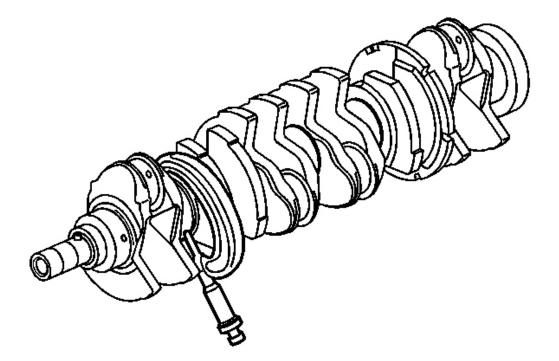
Measuring Diameter Of Crankshaft Bearing Journal Courtesy of GENERAL MOTORS CORP.
